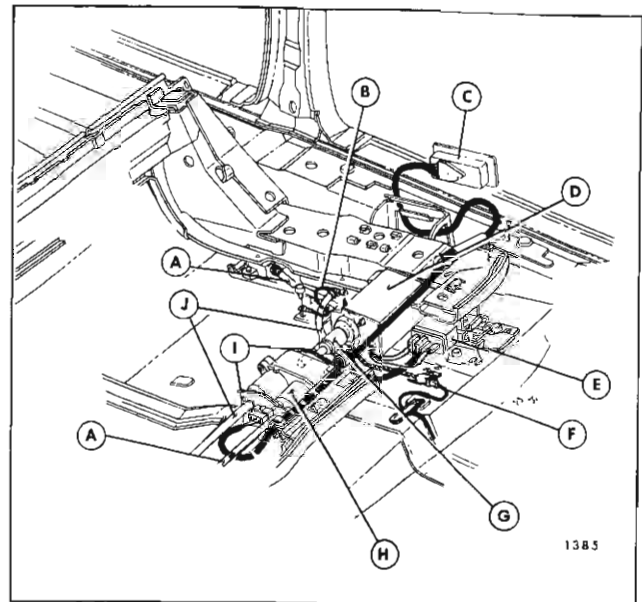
H5—Four-Way Full-Width Seat Electric Wiring
